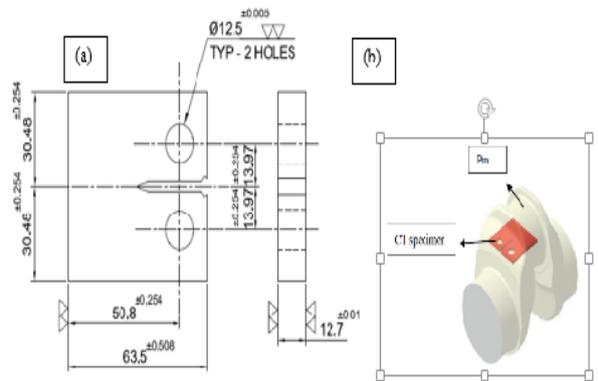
(a) Dimensions of CT specimen (mm), (b) CT specimen pull out location
